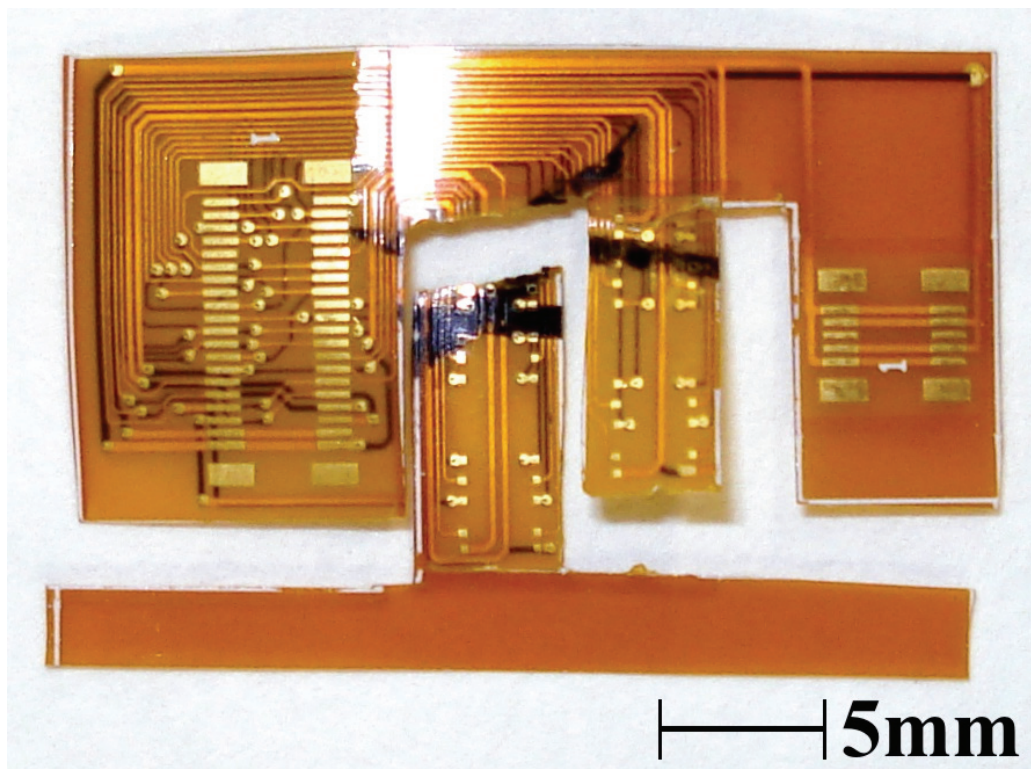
A close-up photograph of a two-layer FPCB showing failure at a fold point near the pedicle screw notch.
